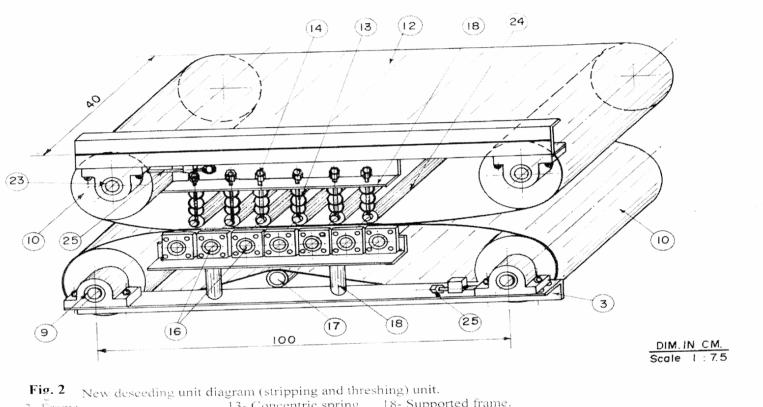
New desceding unit diagram (stripping and threshing) unit.3- Frame.13- Concentric spring.18- Supported frame.9- Ball bearing (30 mm)14- Hexagonal nut.23- Drum shaft.10- Drum  $\phi$  (22 cm)16- Ball bearing  $\phi$  (20 mm).24- Roller  $\phi$  5 cm.12- desceding belt (40 cm width).17- Idler pulley.25- Tension bolt.
